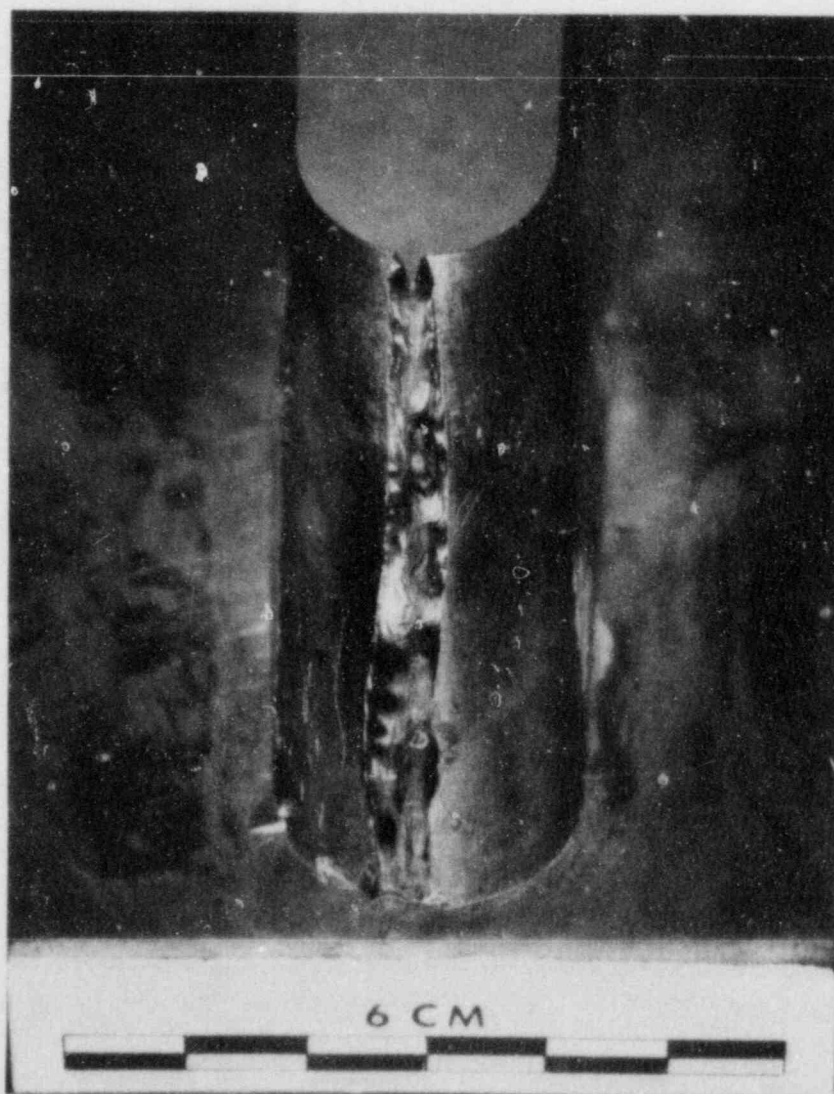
View of juxtaposed EB welds placed in the bottom of slot with and without magnetic shield.
